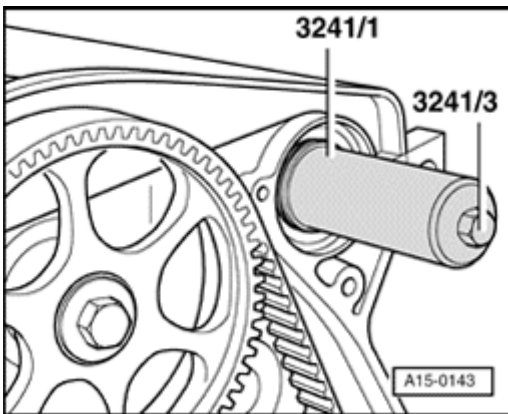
Pressing In Gasket Up To Stop Using Thrust Sleeve 3241/1 And Bolt 3241/3
